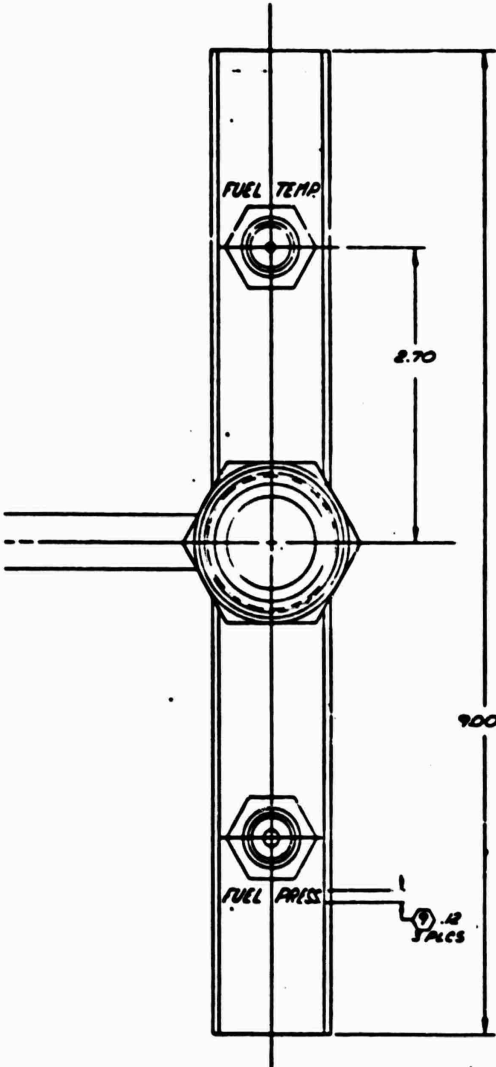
Single-Panel Injector, Unit 2, Triplet Assembly
